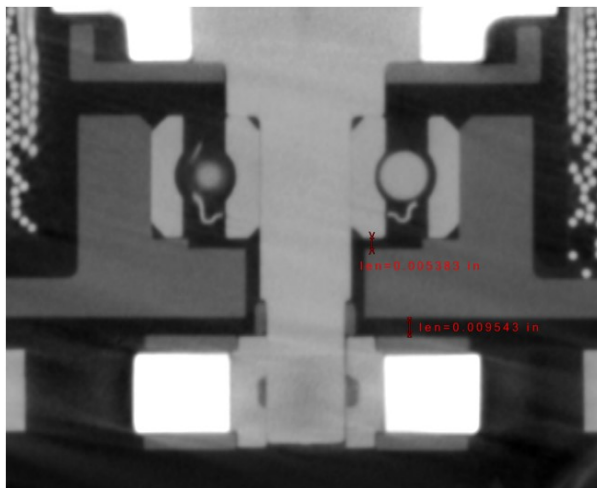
Healthy Motor at the Beginning of Life Showing Bearing Placement and Shaft Fit. The measurements in the images are in inches (0.0095 in = 241 microns)
